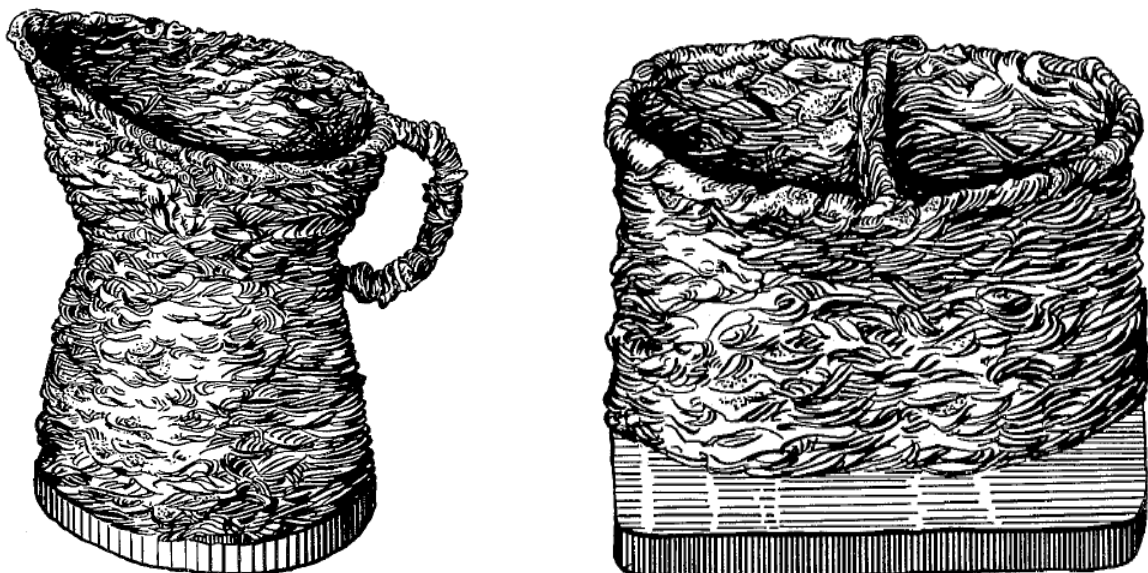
Examples of the objects manufactured firstly using manual weld deposition technique [10].
